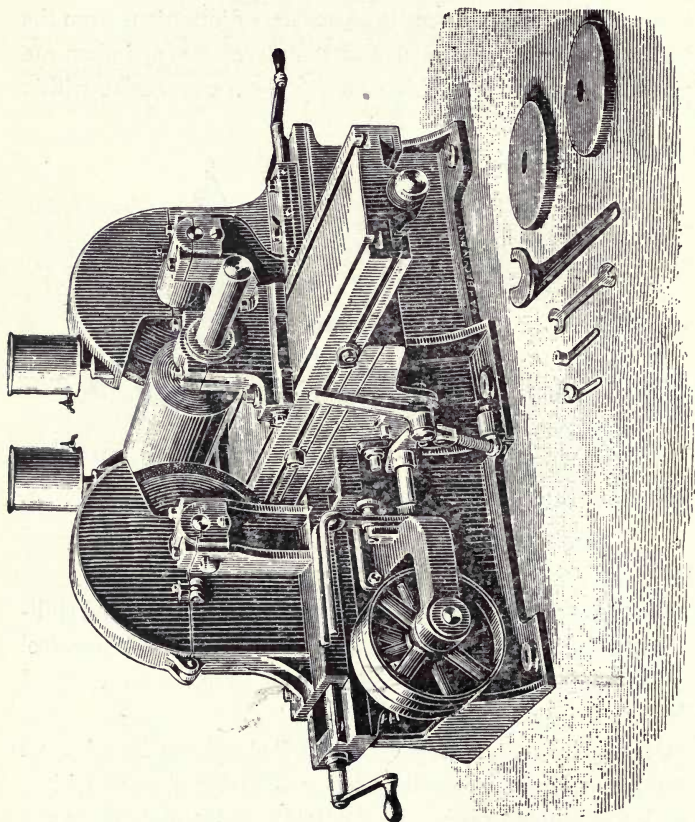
Naxos Union Machine for Grinding Chill Rolls.
